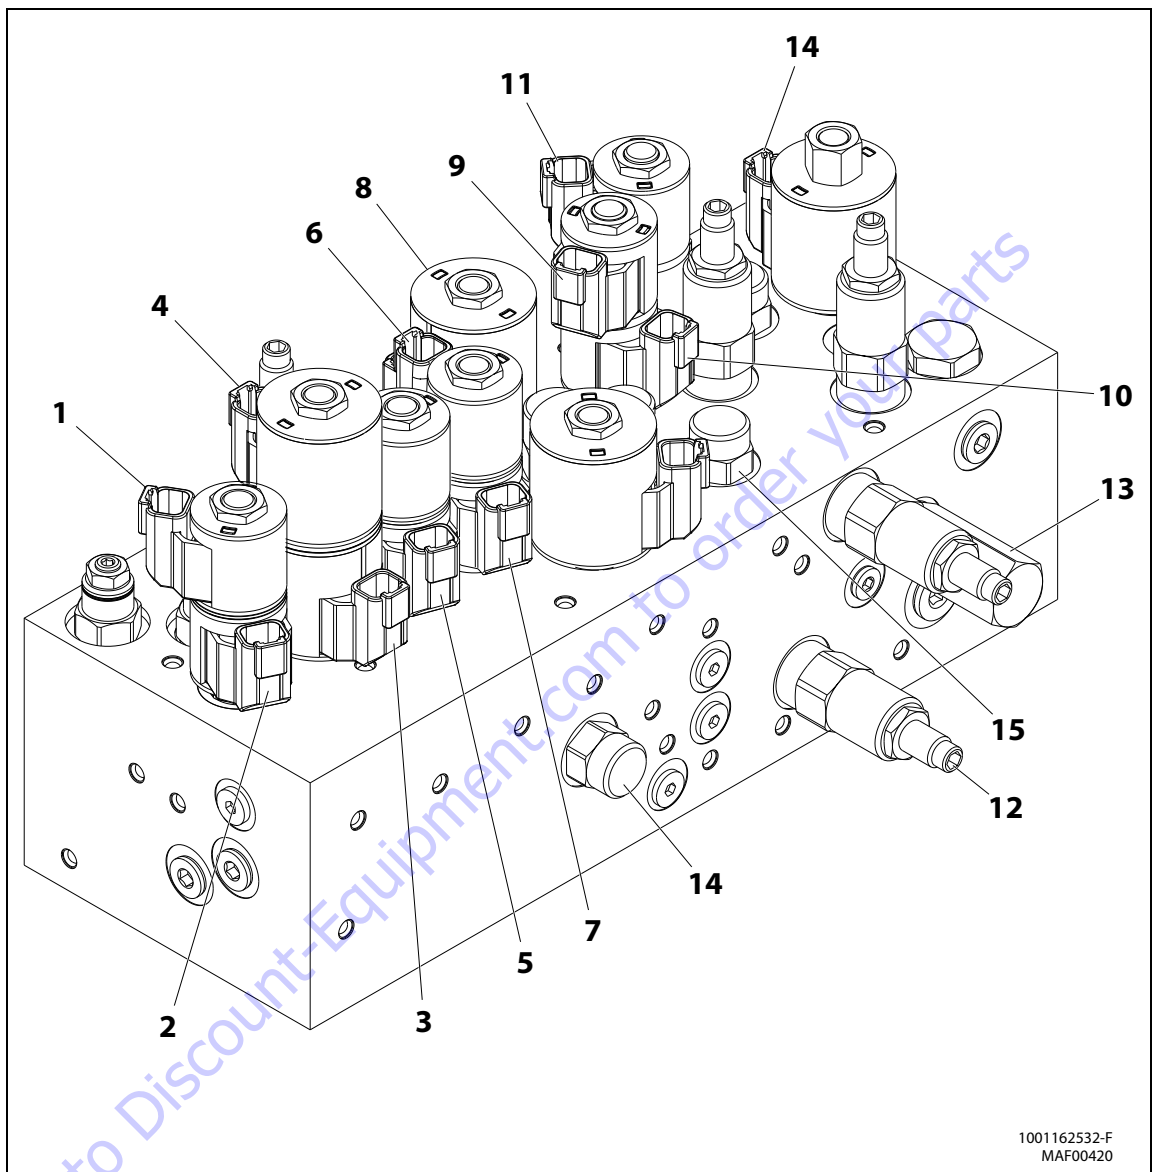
Main Control Valve Identification (400S) - Sheet 1 of 2
